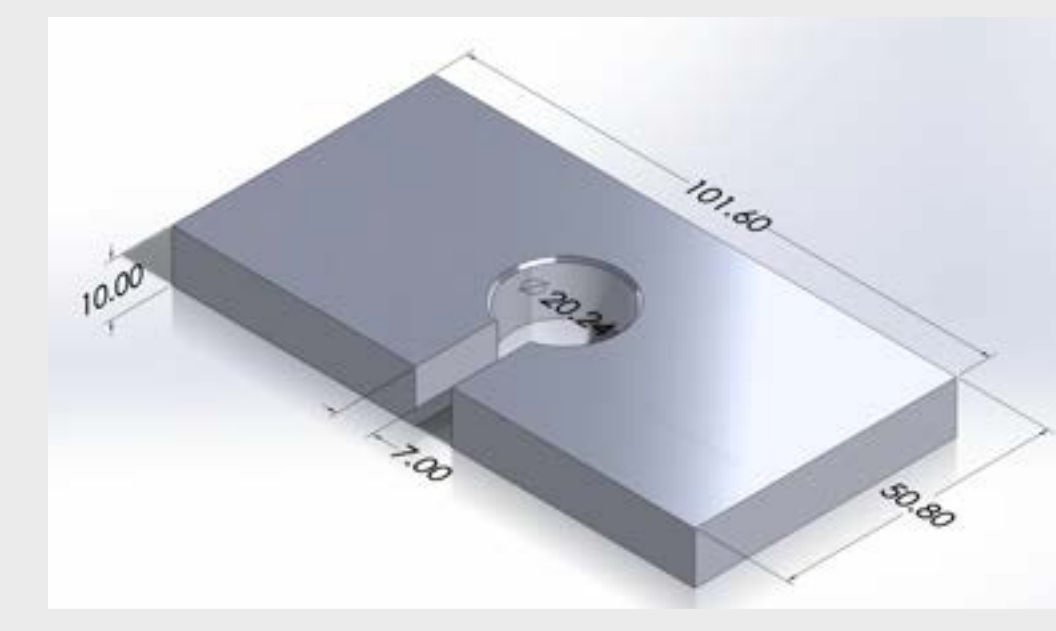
SolidWorks model of load cell housing. Dimensions in mm.
